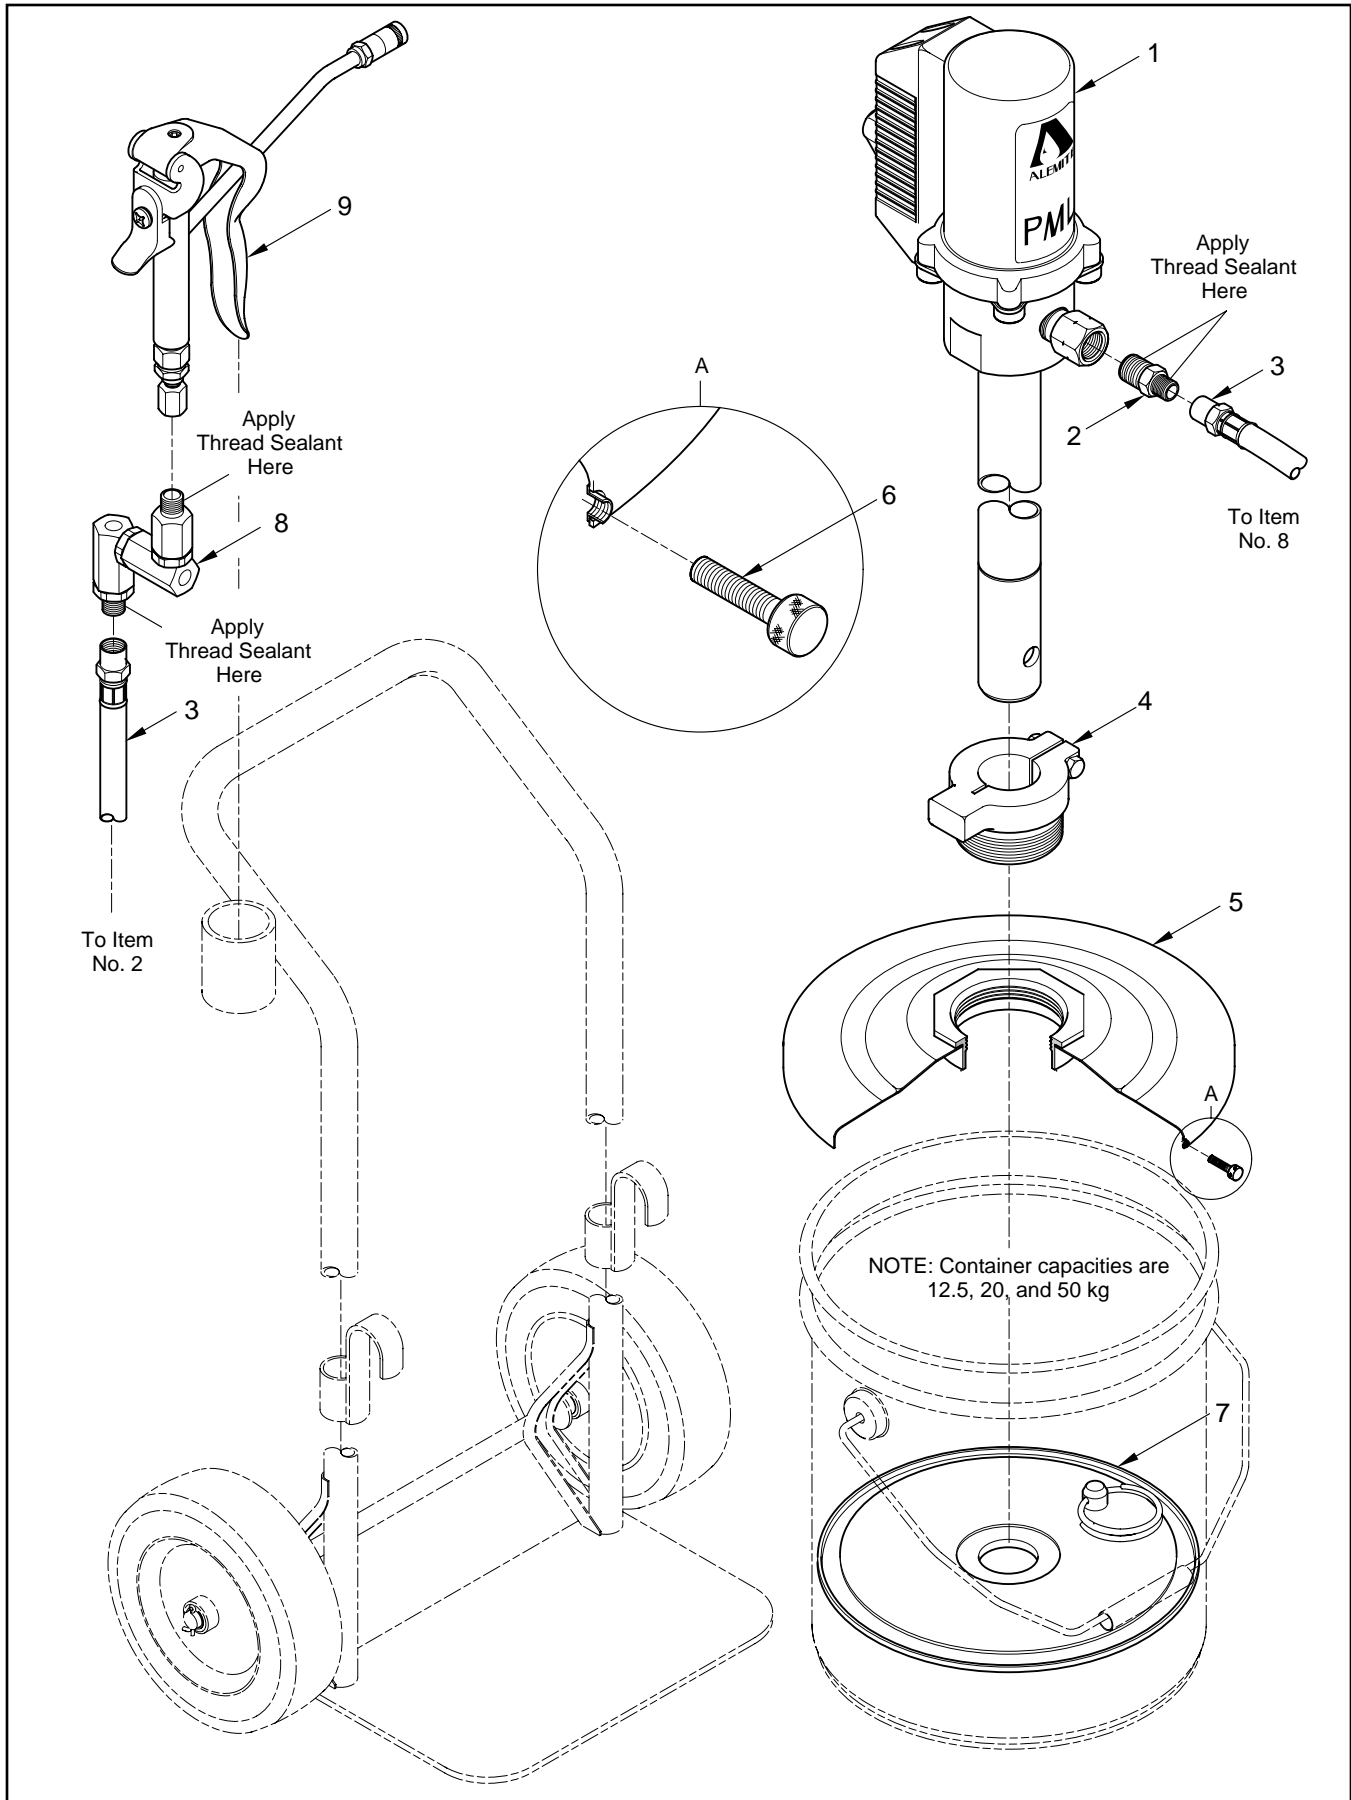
High-Pressure Portable Pump Models 9611-H Series - Exploded View
